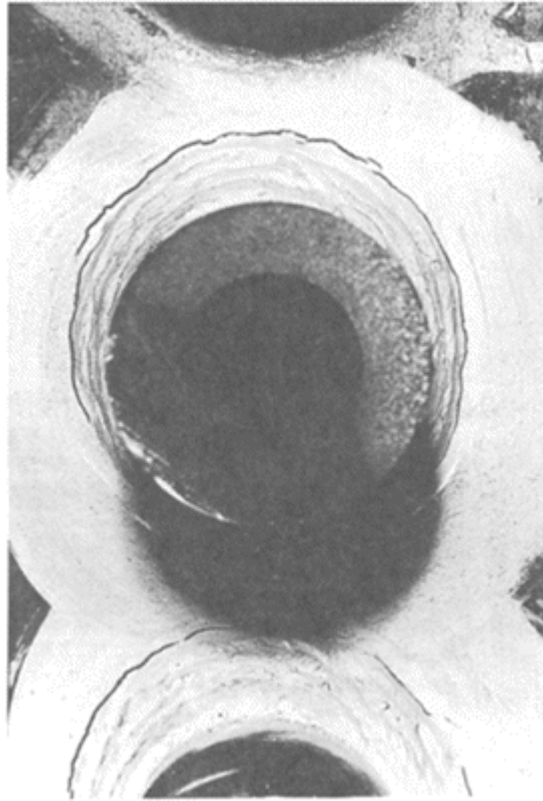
Typical weld toe cracking as shown by magnetic crack detection techniques, on a low sulphur, carbon-manganese steel forging.
